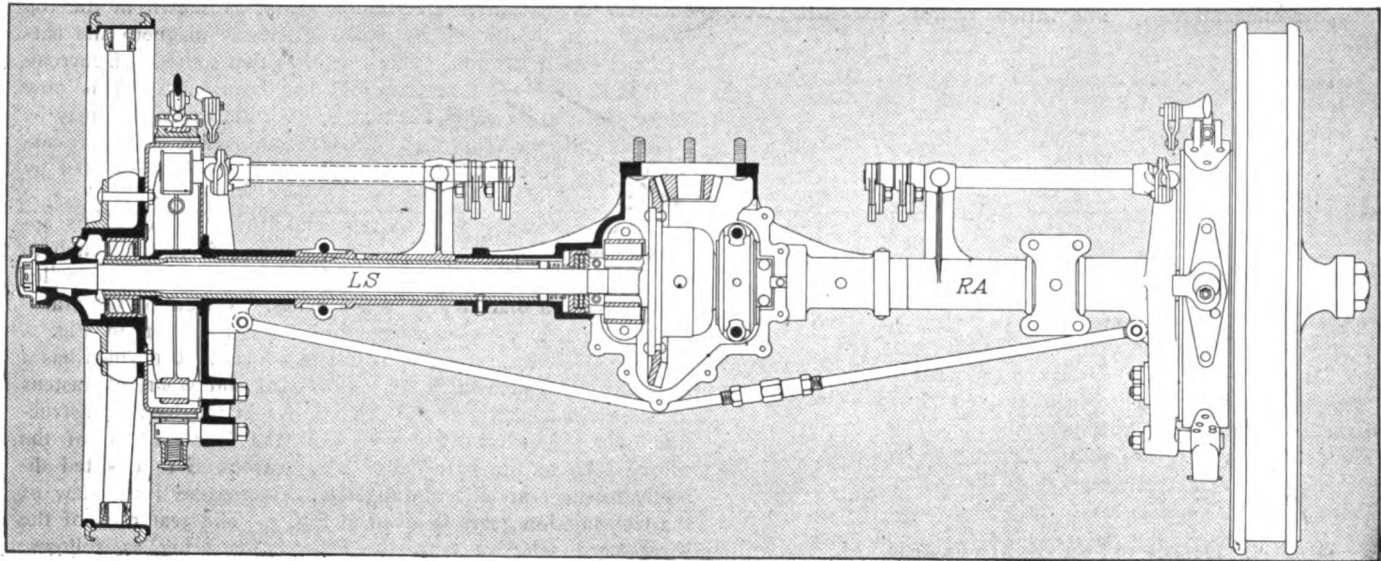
Three-quarter type of floating rear axle used on 1913 Overland line
